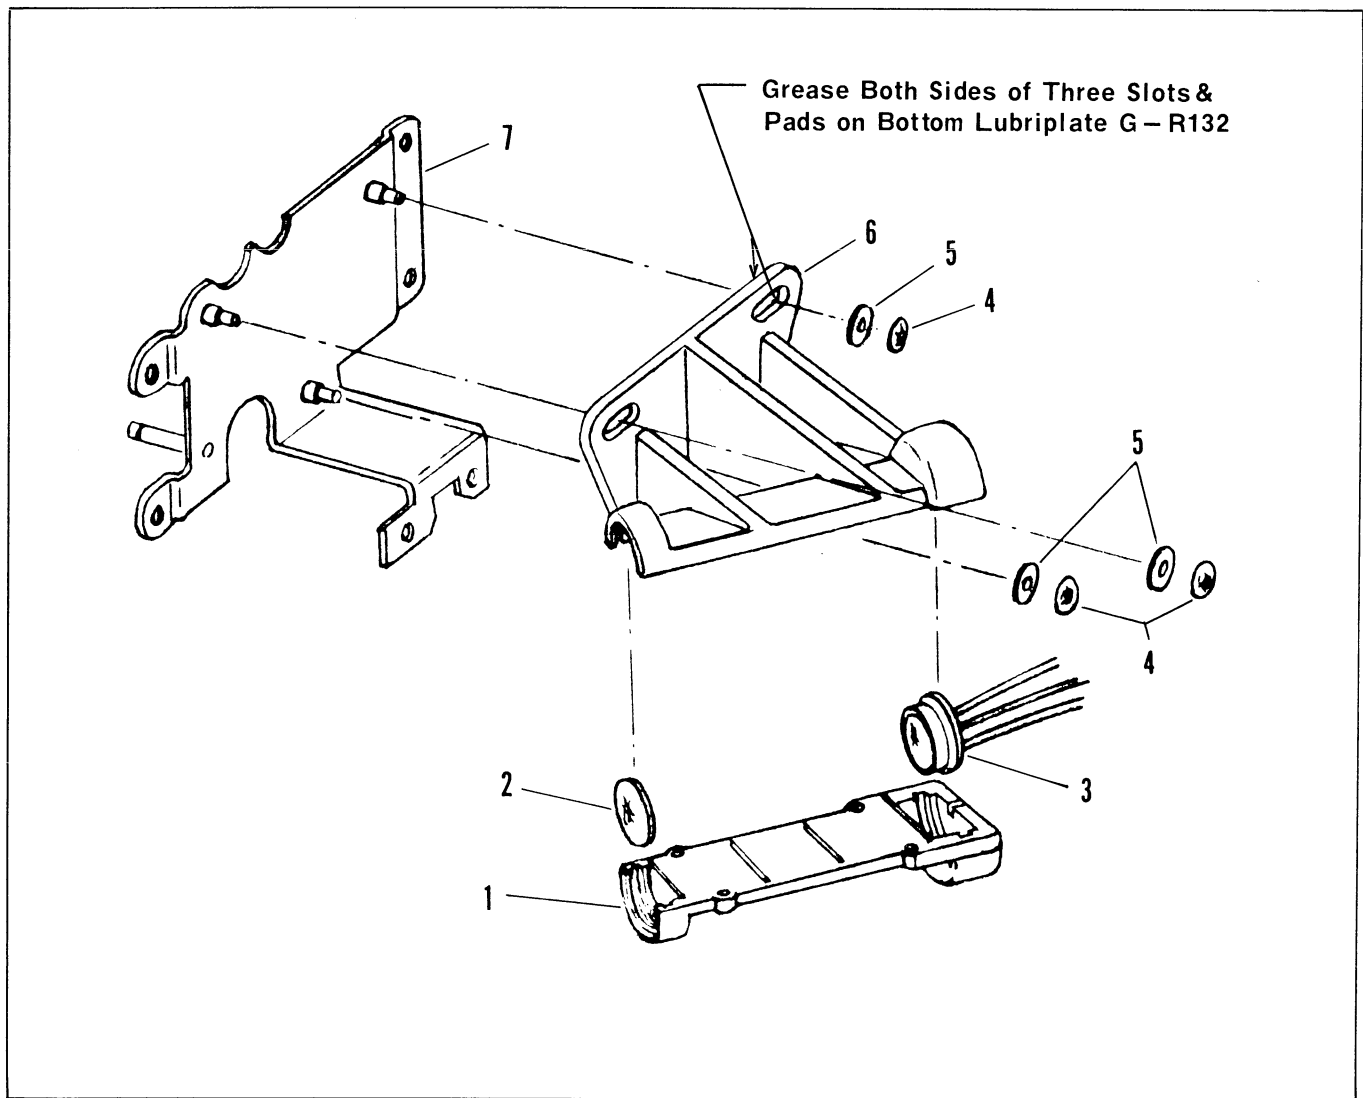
Autofocus Photocell Carrier and Bracket Assembly
